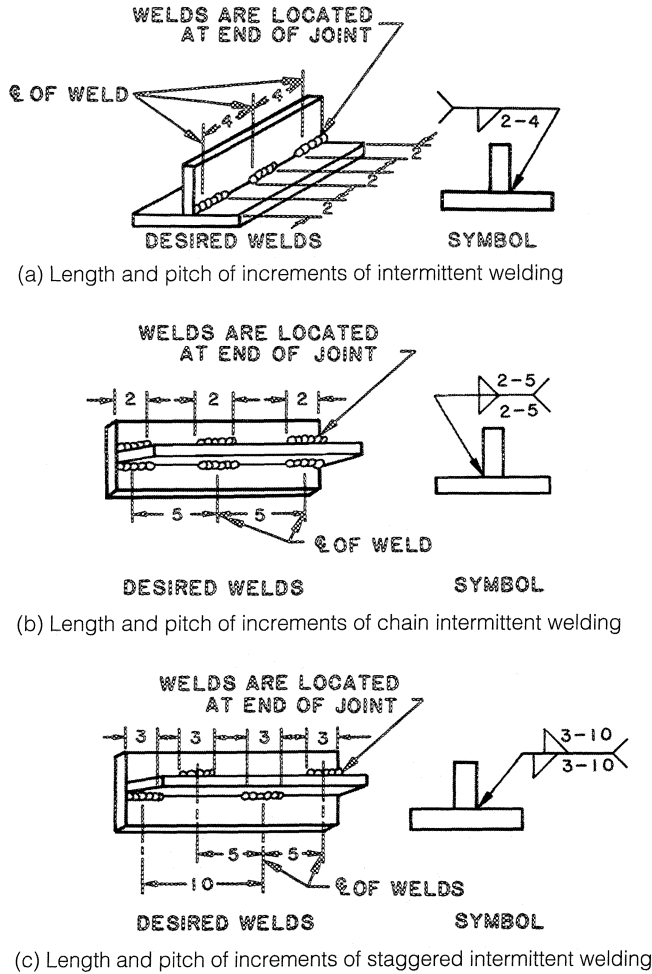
Application of Dimensions to Intermittent Fillet Welding Symbols
